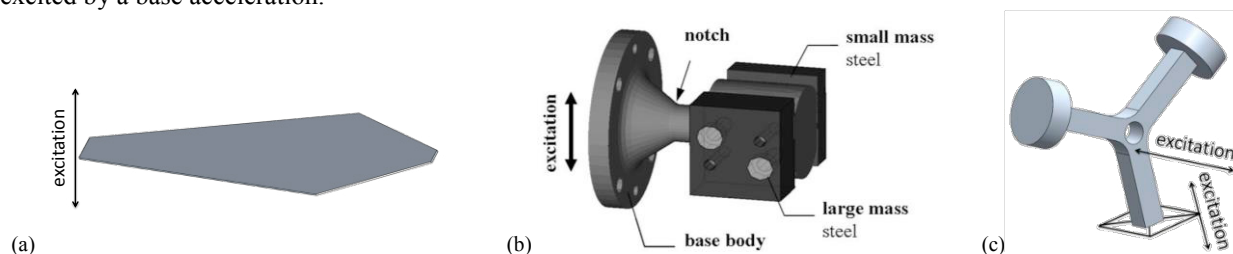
(a) trapezoidal plate specimen; (b) cylindrical specimen with eccentric tip mass; (c) Y-specimen
